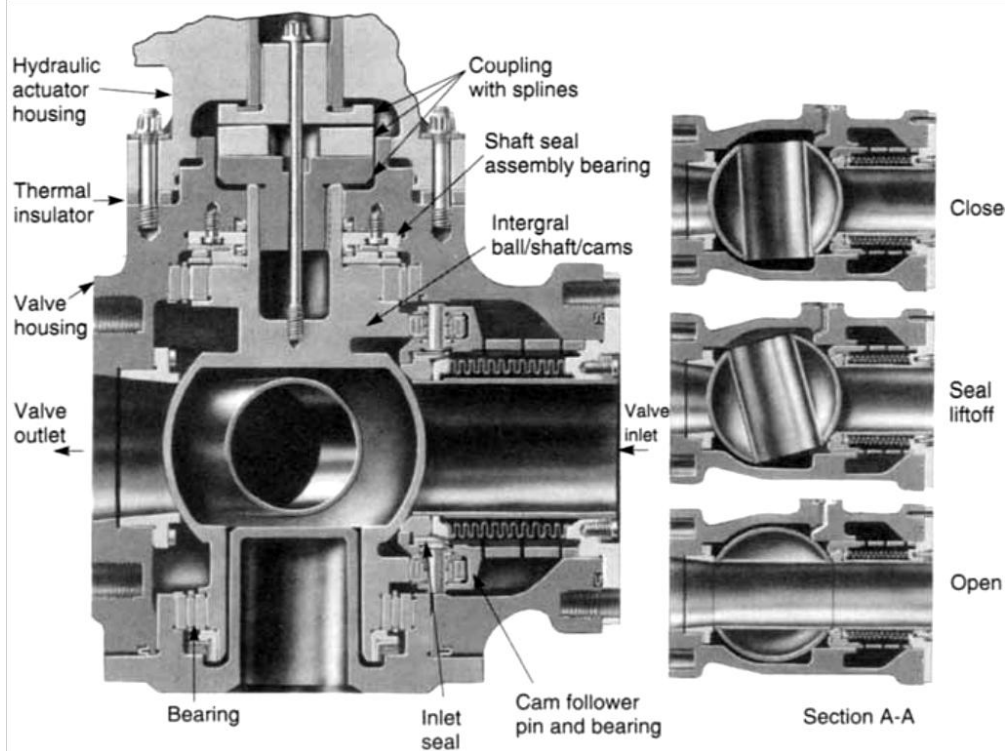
The SSME main oxidizer valve is a low-pressure drop ball valve representative of high-pressure large valves used in rocket engines. The ball and its integral shaft rotate in two bearings. The seal is a machined plastic ring spring-loaded by a bellows against the inlet side of the ball. Two cams on the shaft lift the seal a short distance off the ball within the first few degrees of ball rotation. The ball is rotated by a precision hydraulic actuator (not shown) through an insulating coupling.
